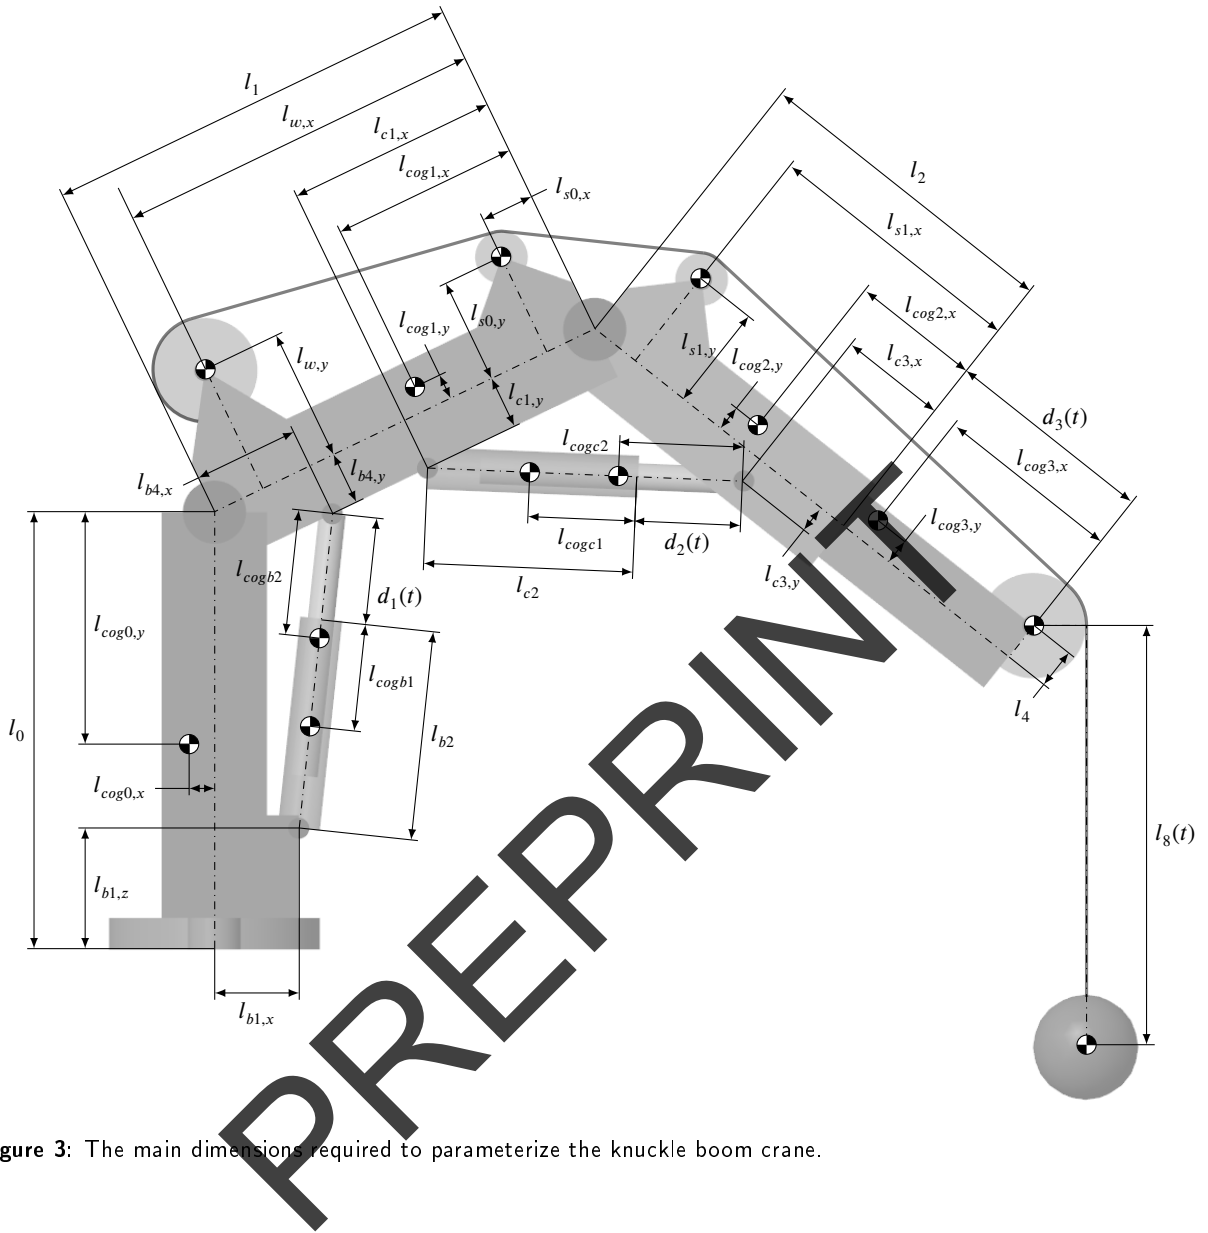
The main dimensions required to parameterize the knuckle boom crane.
